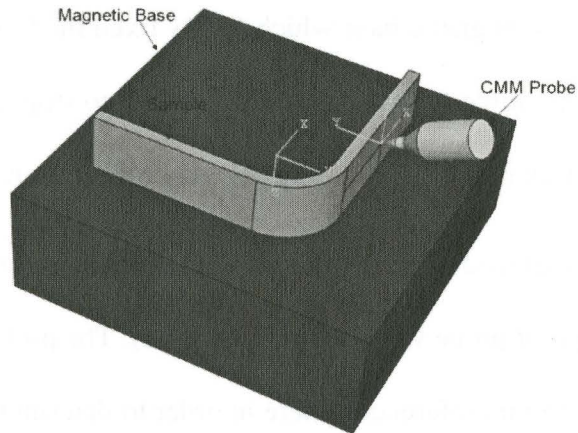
Schematic of the CMM inspection of a bending sample firmly fixed to a toolmakers magnetic base.
